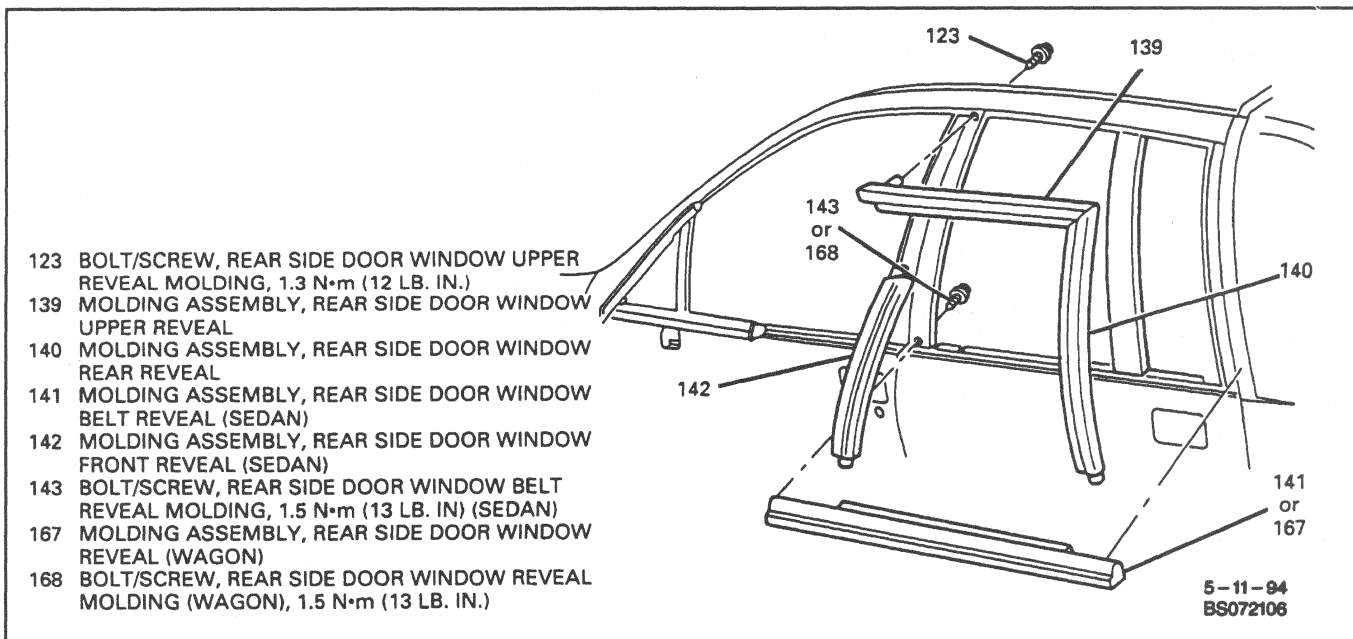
Rear Side Door Window Reveal Molding-(Buick)
